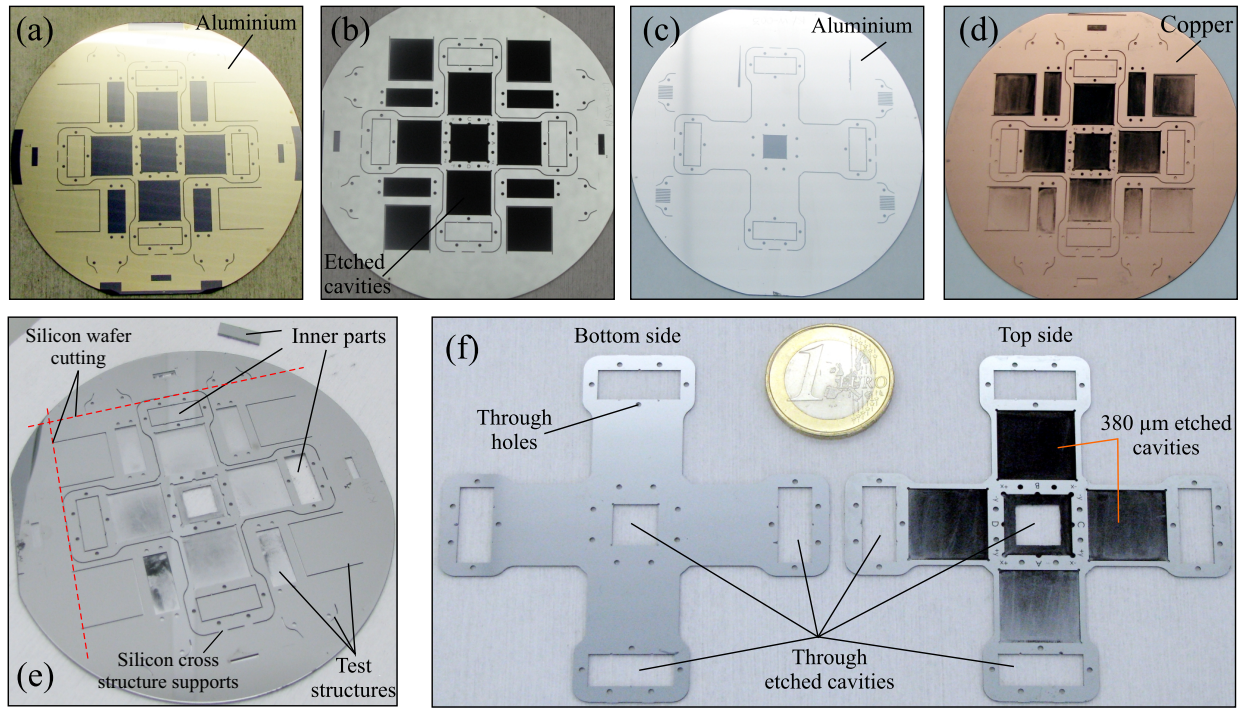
Different views of the silicon wafer during microfabrication process (a) Top side with structure aluminium (b) Top side etched (c) Bottom side with structure aluminium (d) Top side with 2 μm copper layer (e) Through etched wafer with removed inner part (f) Real view of the microfabricated silicon cross structure
